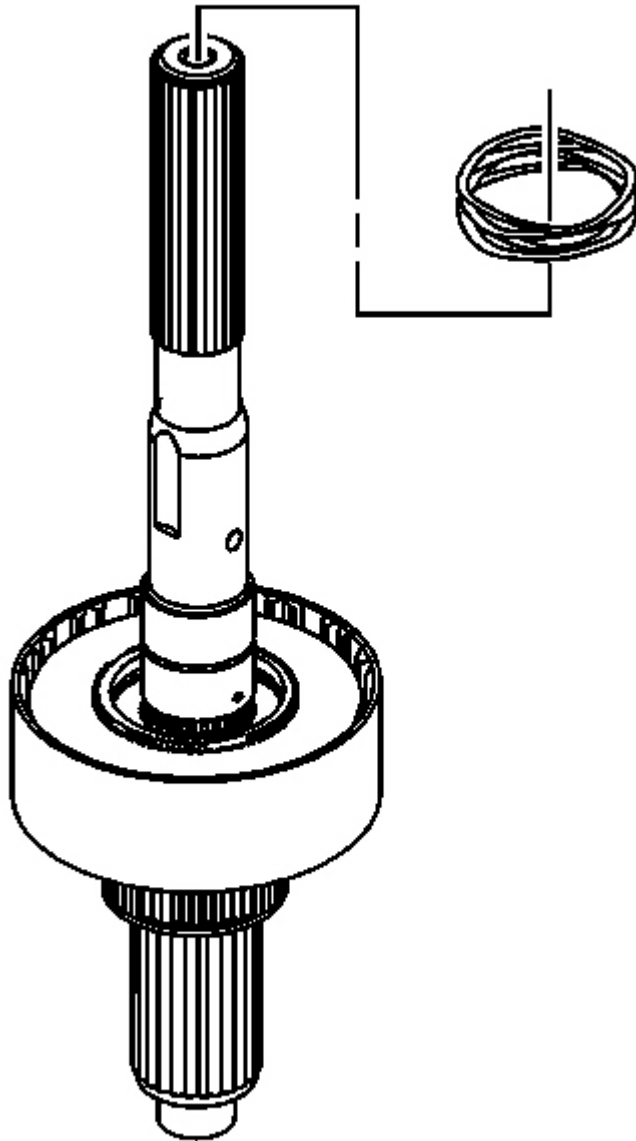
Locating Clutch Pressure Plate Bearing
